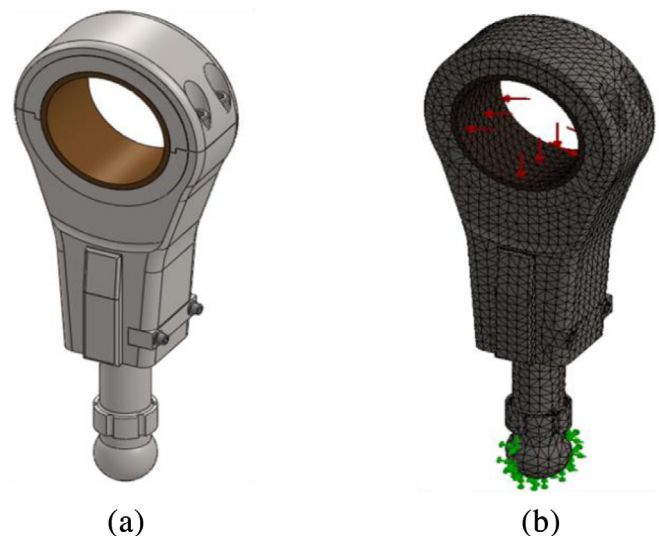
Connecting rod assembly: (a) Solid CAD model, (b) Meshed model with loads and fixtures.
